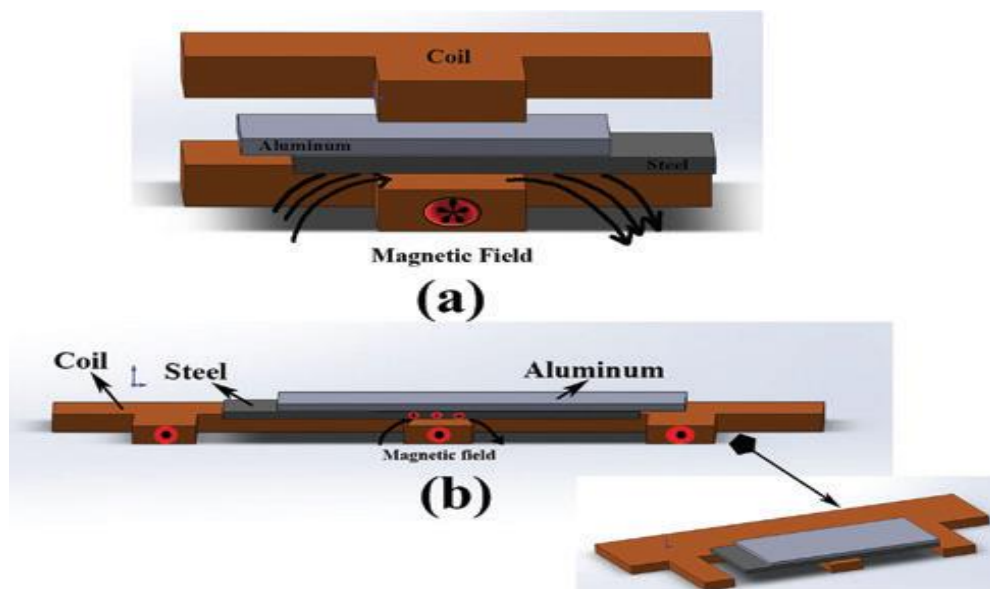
Magnetic Pulse welding coil design (a) T shape (b) E shape [24]
